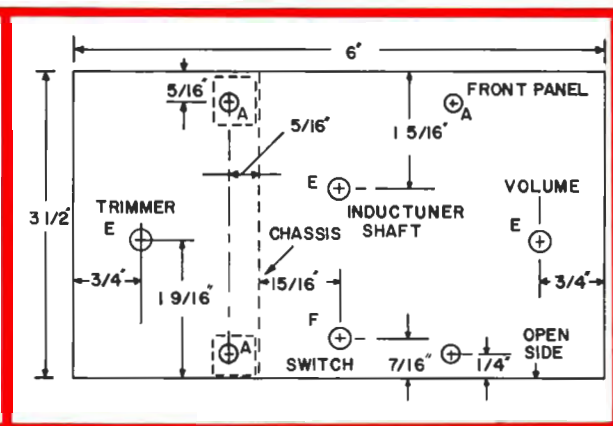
FRONT PANEL LAYOUT for the VHF receiver. The Inductuner shaft should be centered in the panel hole to avoid binding. Hole sizes are given in TABLE II—HOLE SIZE CHART.
